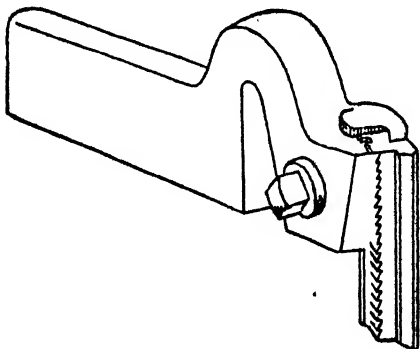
Spring Tool-Holder for Screw-Cutting Tools.
